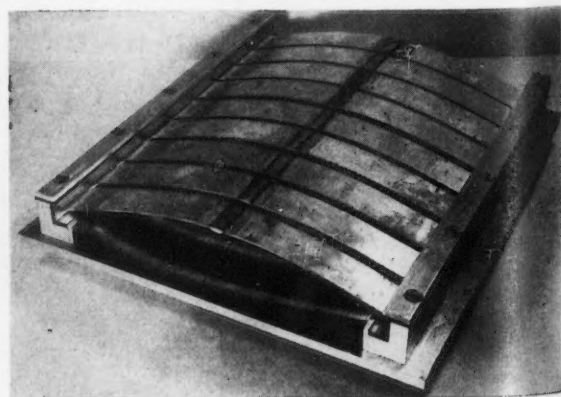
Specimen frame for stress corrosion cracking apparatus.
